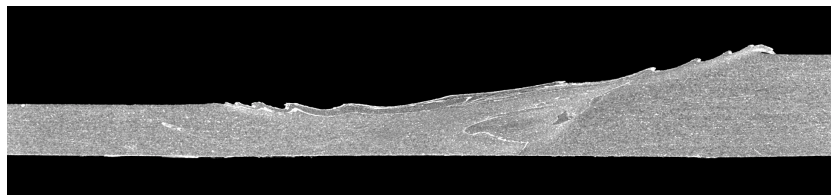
Weld Cross-Section (1mm to 2mm 6061-T6)
